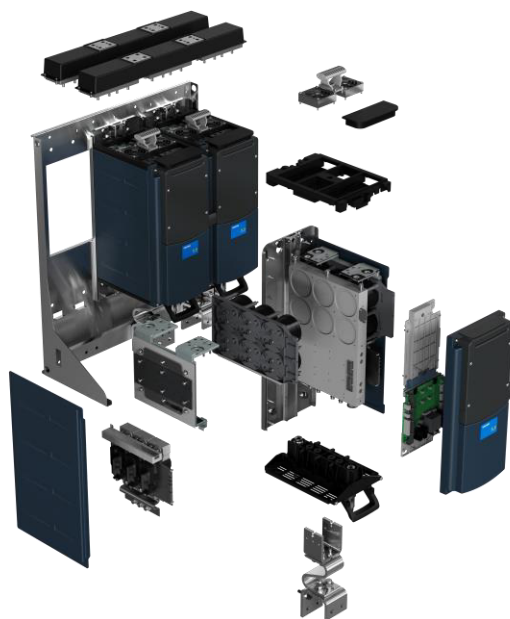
Exploded view of the Vacon NXP Inverter Module Liquid Cooled 525-690 Vac, Frame size ch64.
